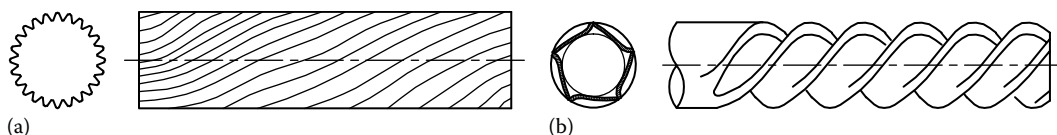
Spirally fluted tubes. (a) External helical rib and (b) both internally and externally corrugated tube (schematic).
